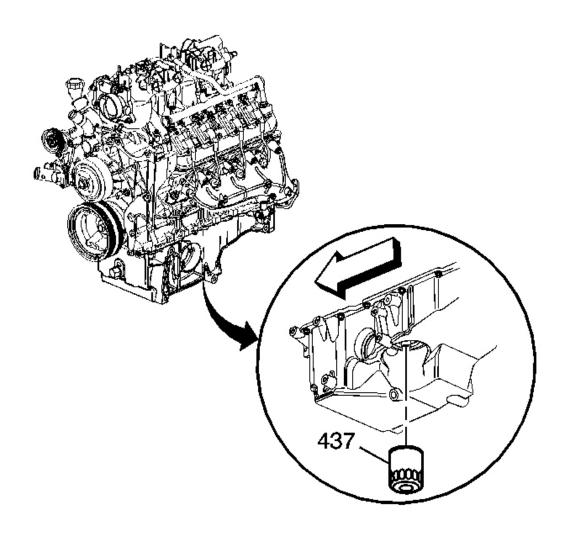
Engine Oil Filter Courtesy of GENERAL MOTORS CORP.
